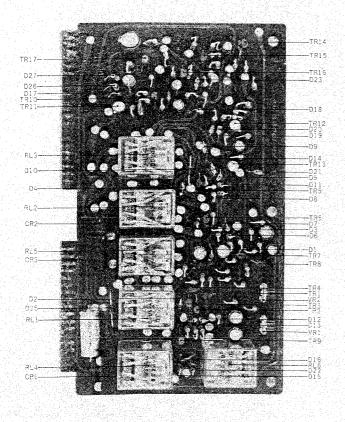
PHOTO OF SERVO P.C. BOARD (KH-1011)
